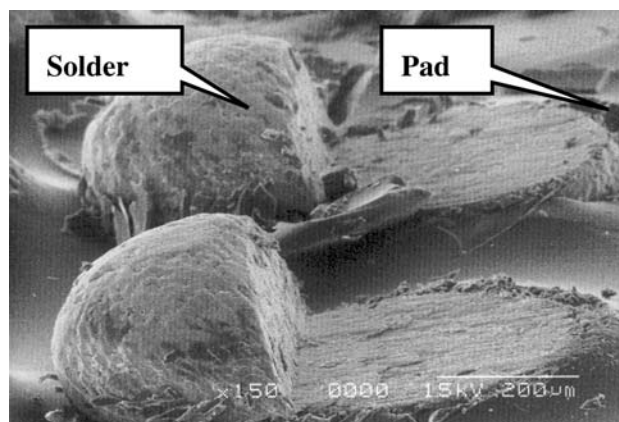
SEM fractured surface of the Sn-15In-2.8Ag solder ball after shear test
